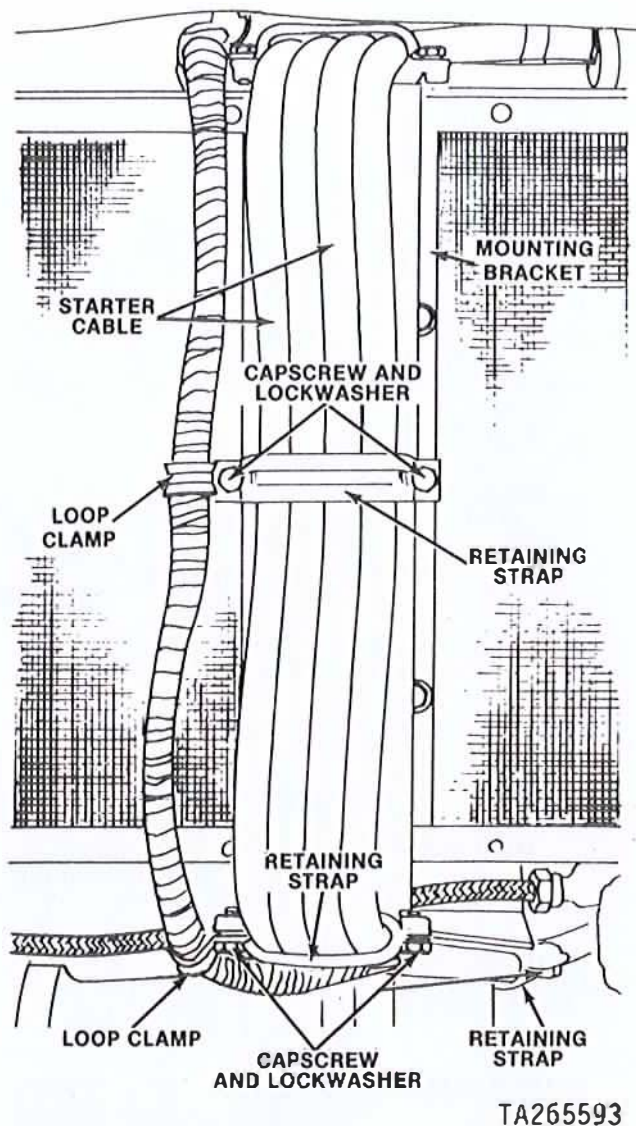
Removing or Installing Starter, Smoke and Dust Detector Electrical Cable
